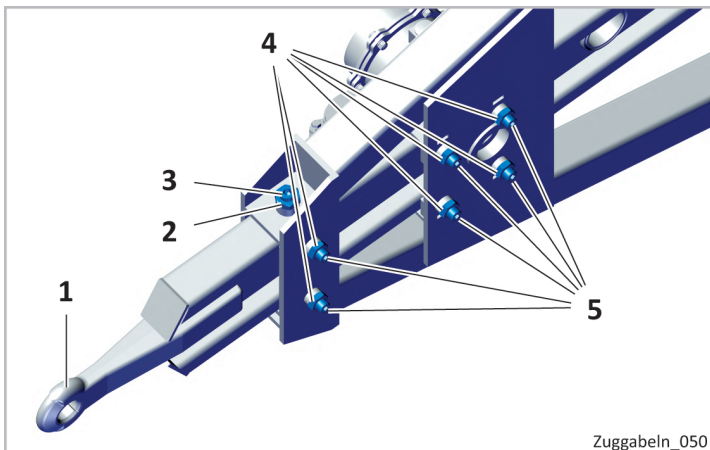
Adjusting the play of the towbar pipe of drawbar GZLV
